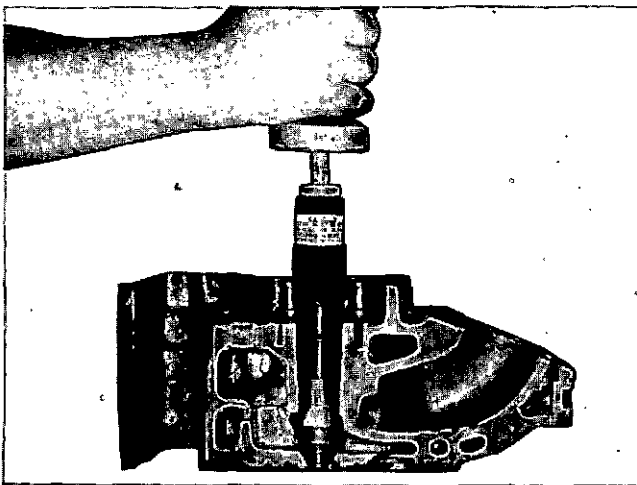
, V40246. Removing injector sleeve with ST-1153
